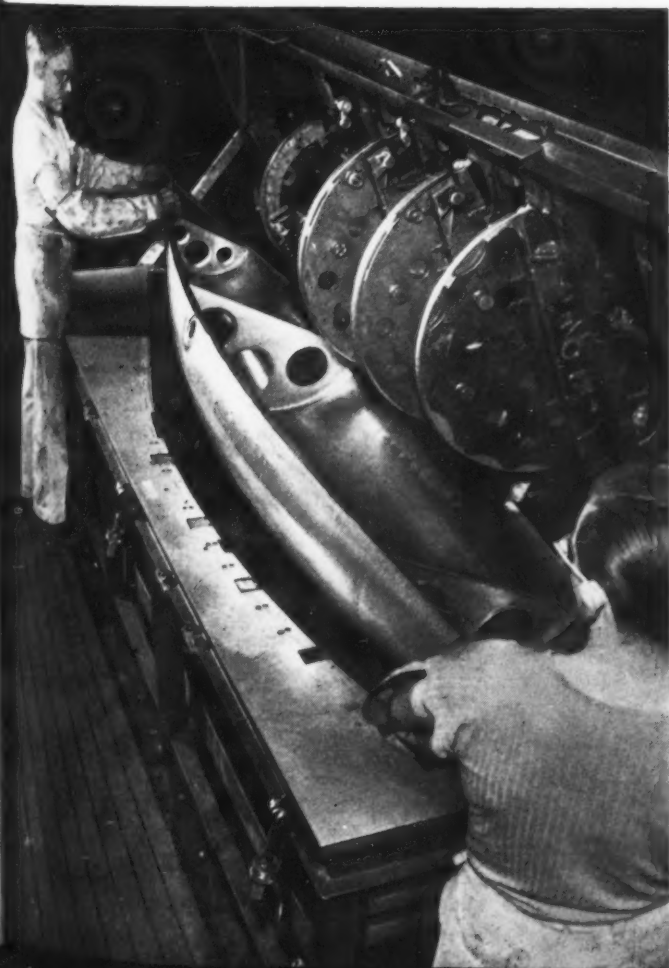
Ingenious Fixture for Welding Seven Bulkheads to Fuel Tank. Two Semi-automatic Welding Machines are Employed, One Fastening the Three Bulkheads Shown, and the Other the Remaining Four
